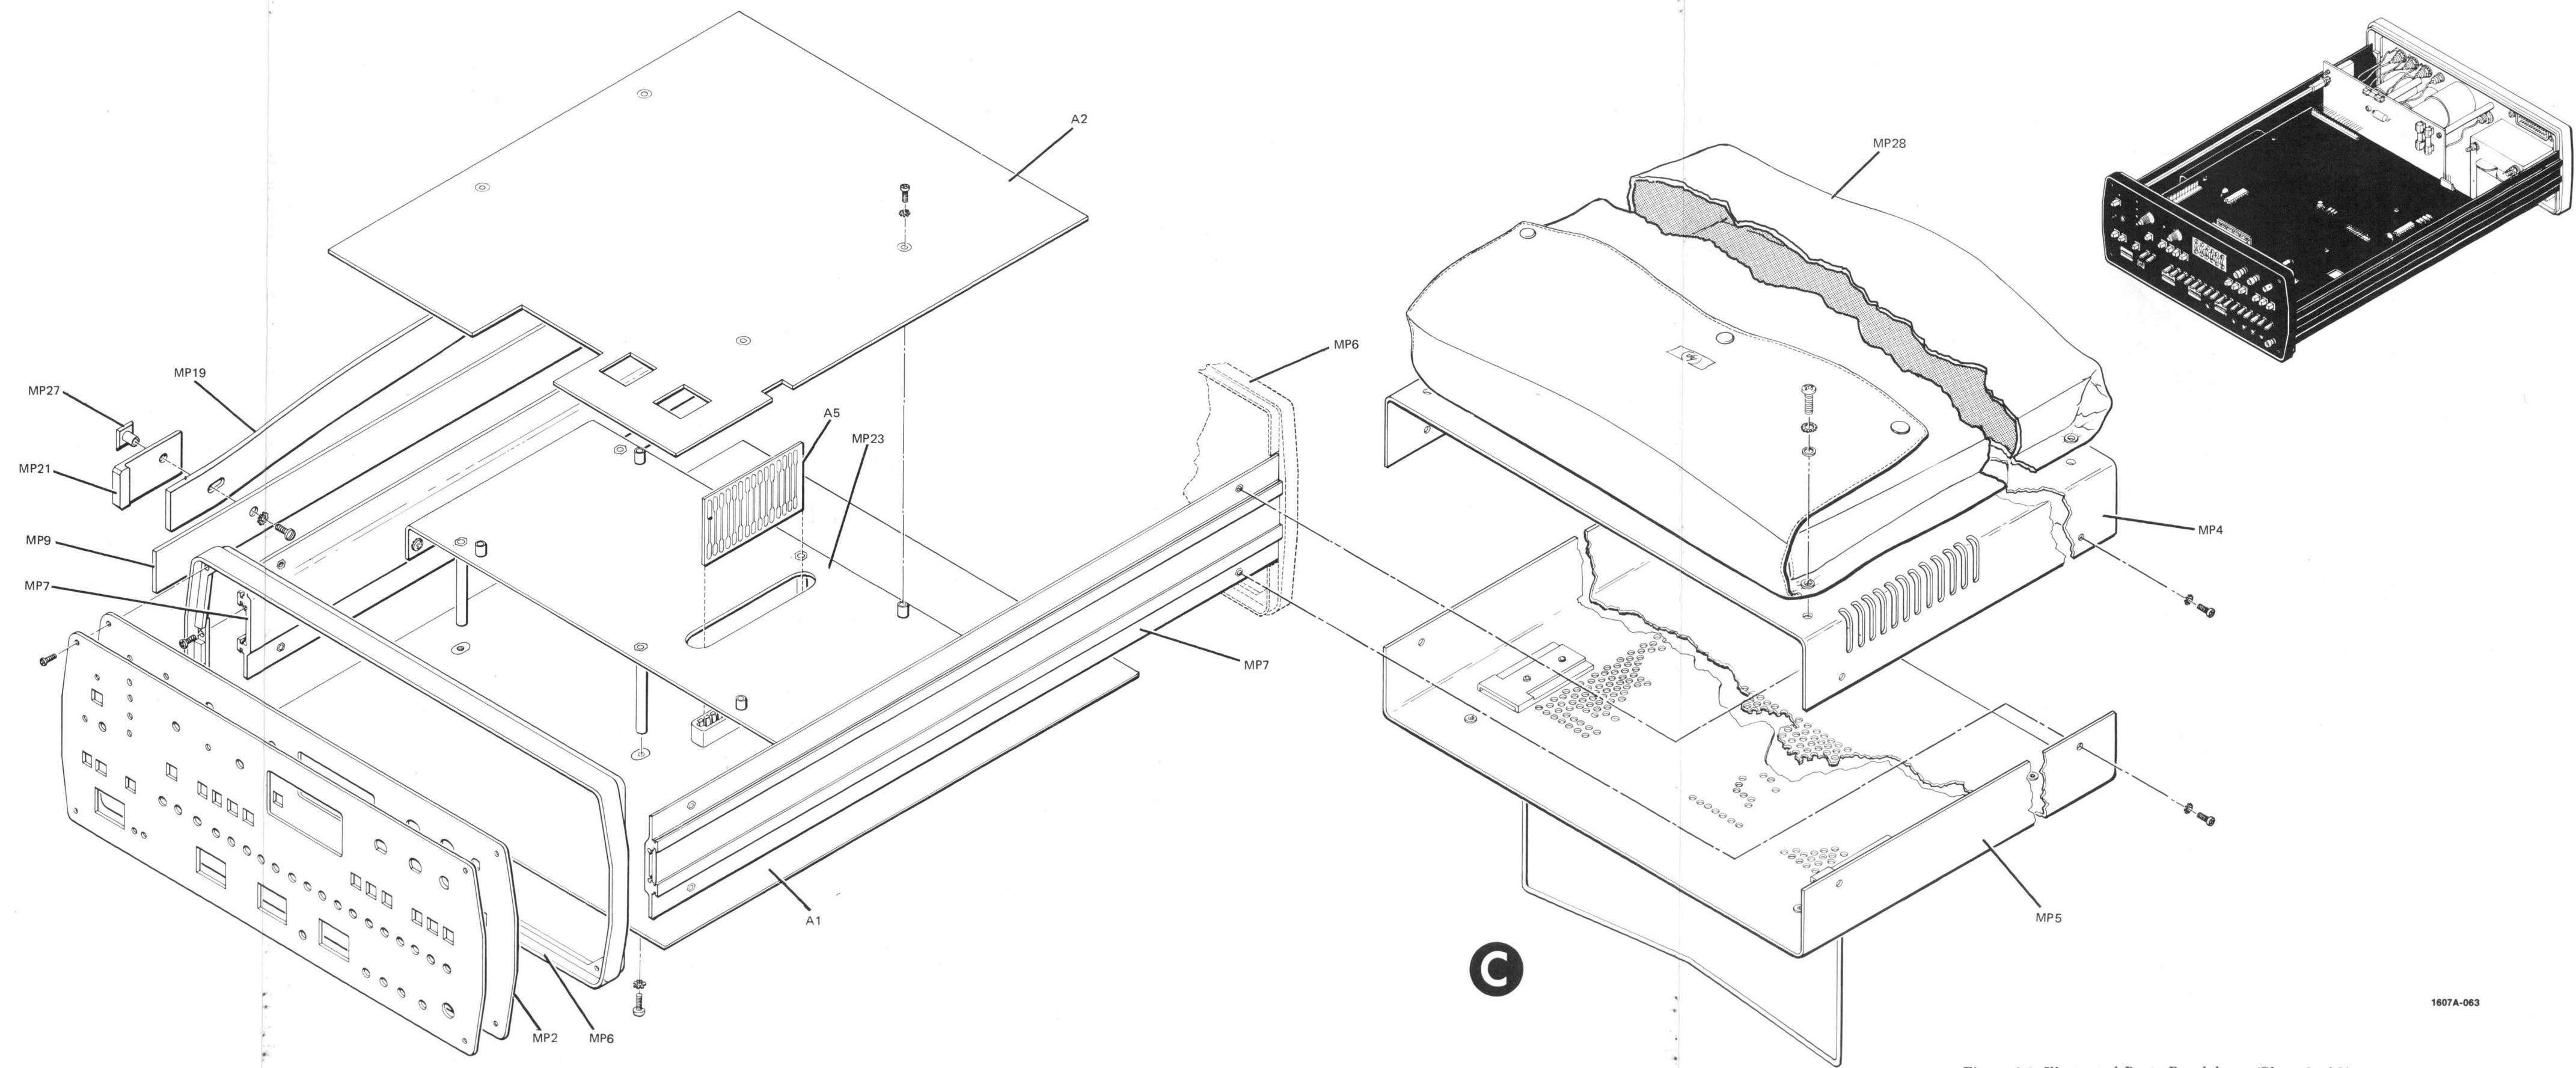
Illustrated Parts Breakdown (Sheet 3 of 3)
